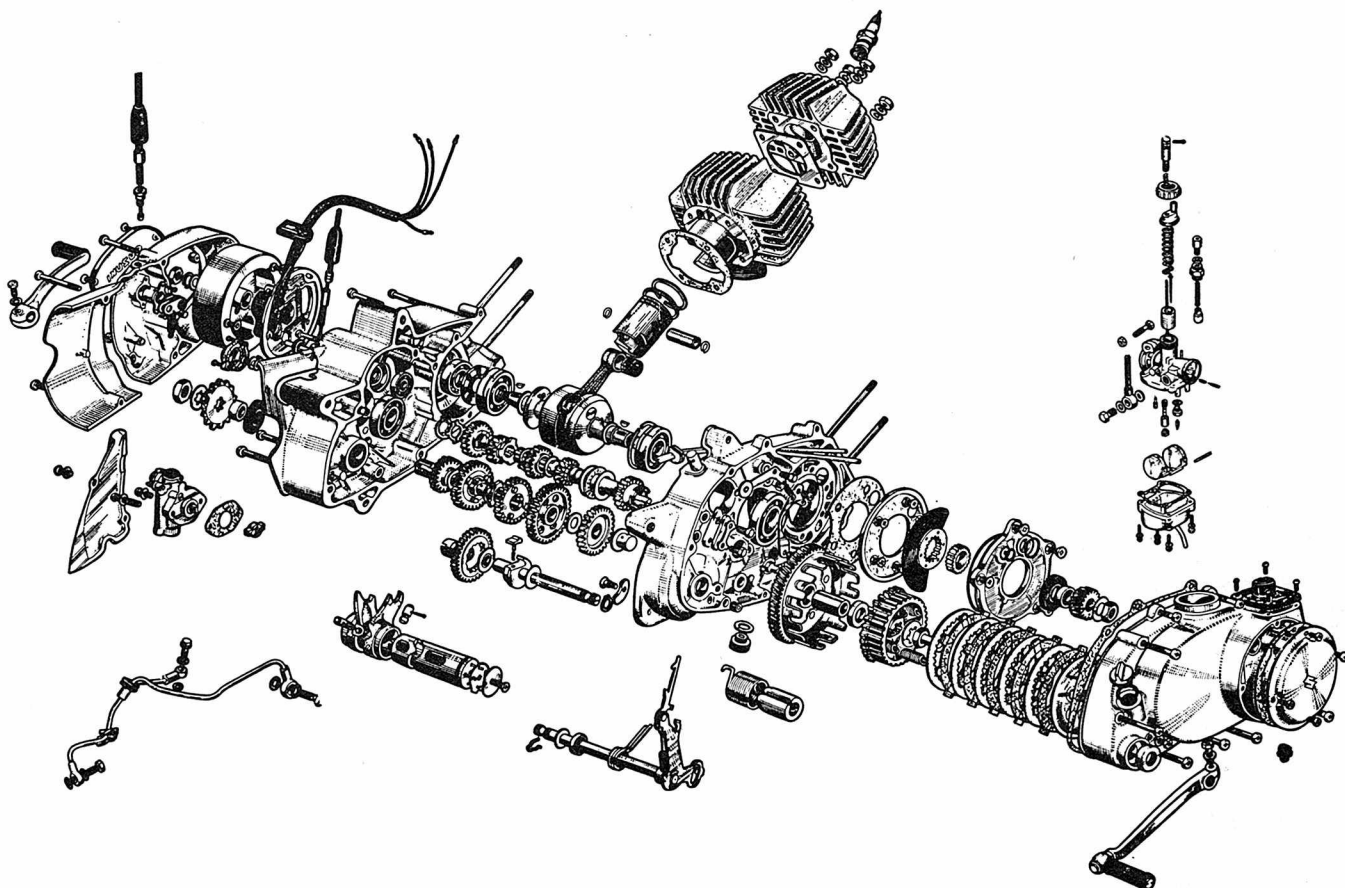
Exploded view of the engine and transmission assembly used on A100, AS100 and AC100 models.
